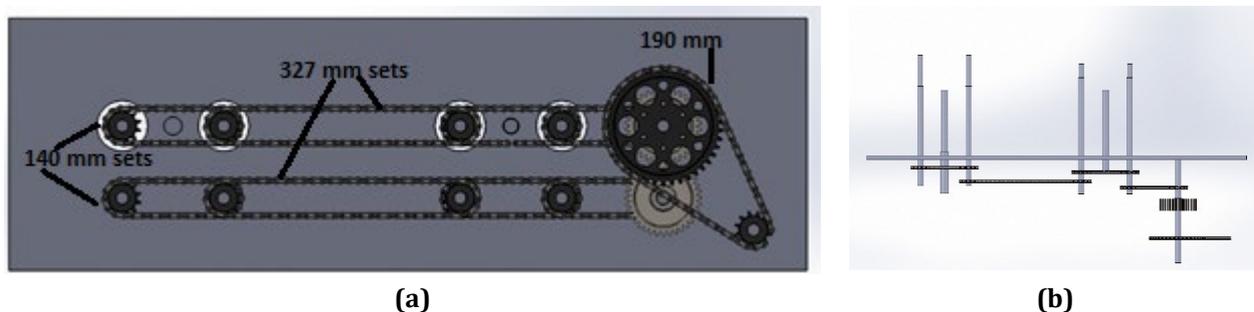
Chain sprocket & gearing system (a) Front view; (b) Top view
